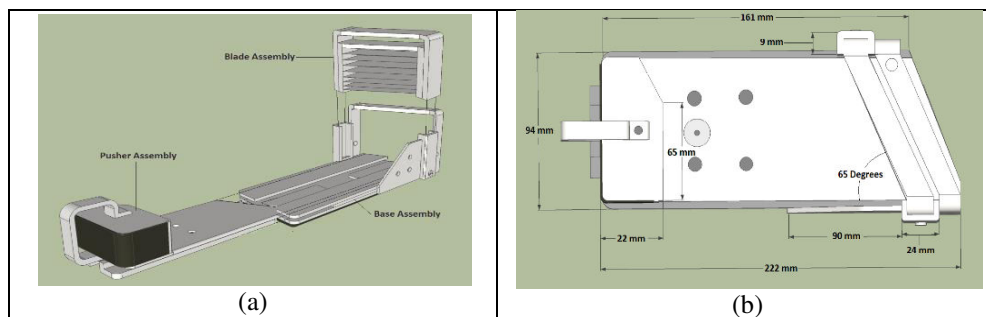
(a) Exploded view of the device; (b) Top view of the device and its dimensions.
